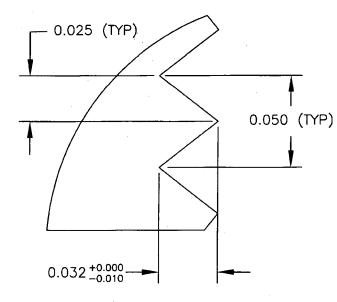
DETAIL A: SLOT DETAIL SCALE 2:1 VIEW ROTATED
